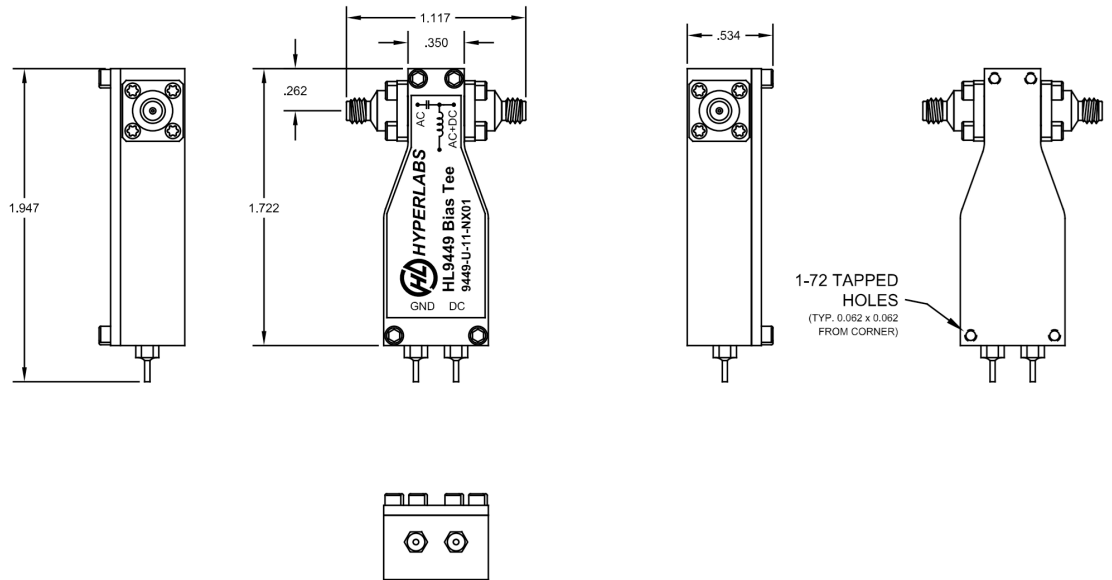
HL9449 with DC bias pins Mechanical Drawing
